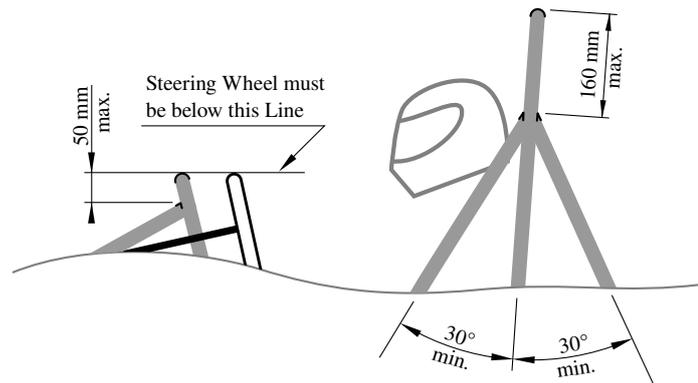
Front hoop bracing, main hoop bracing and steering wheel requirements
